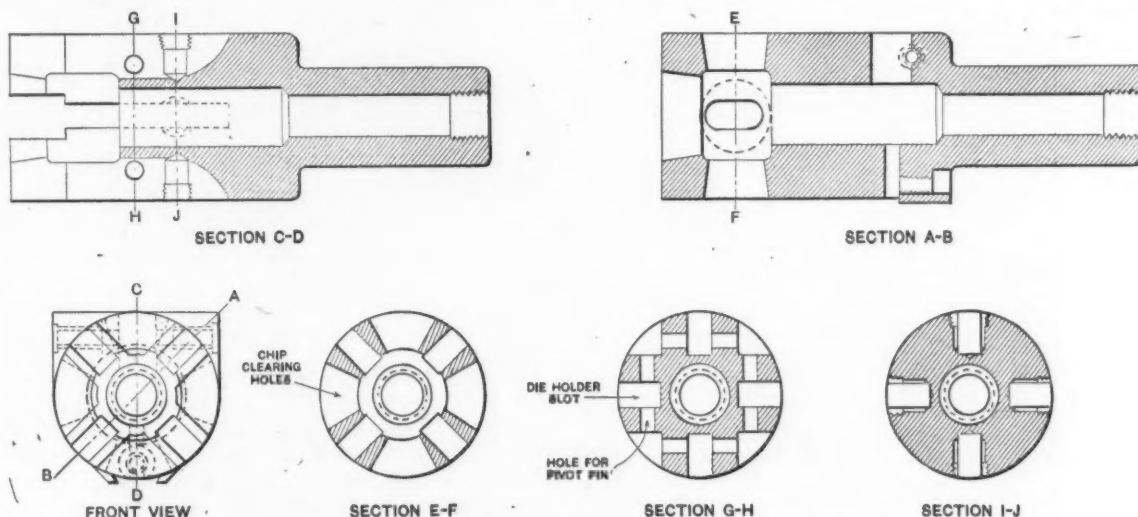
Details of Some of the Parts of the Diamond Self-Closing Die Head.
